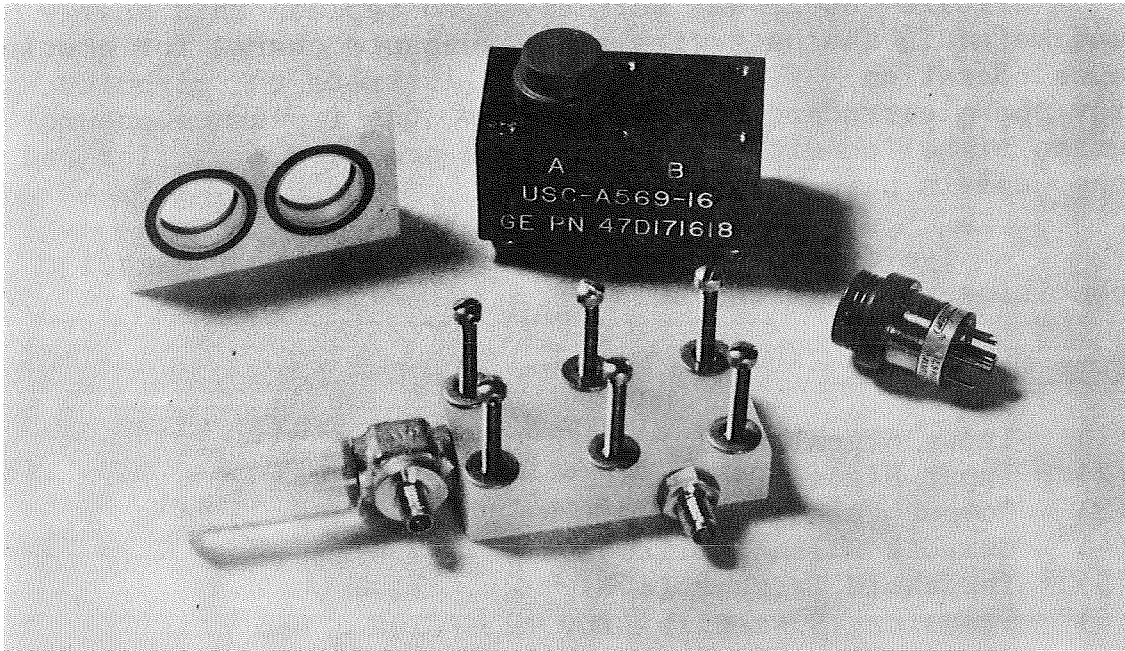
TRANSDUCER MOUNT ASSEMBLY
